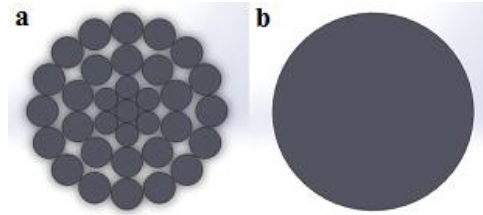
(a) ACSR cable (b) Aluminium cylinder
